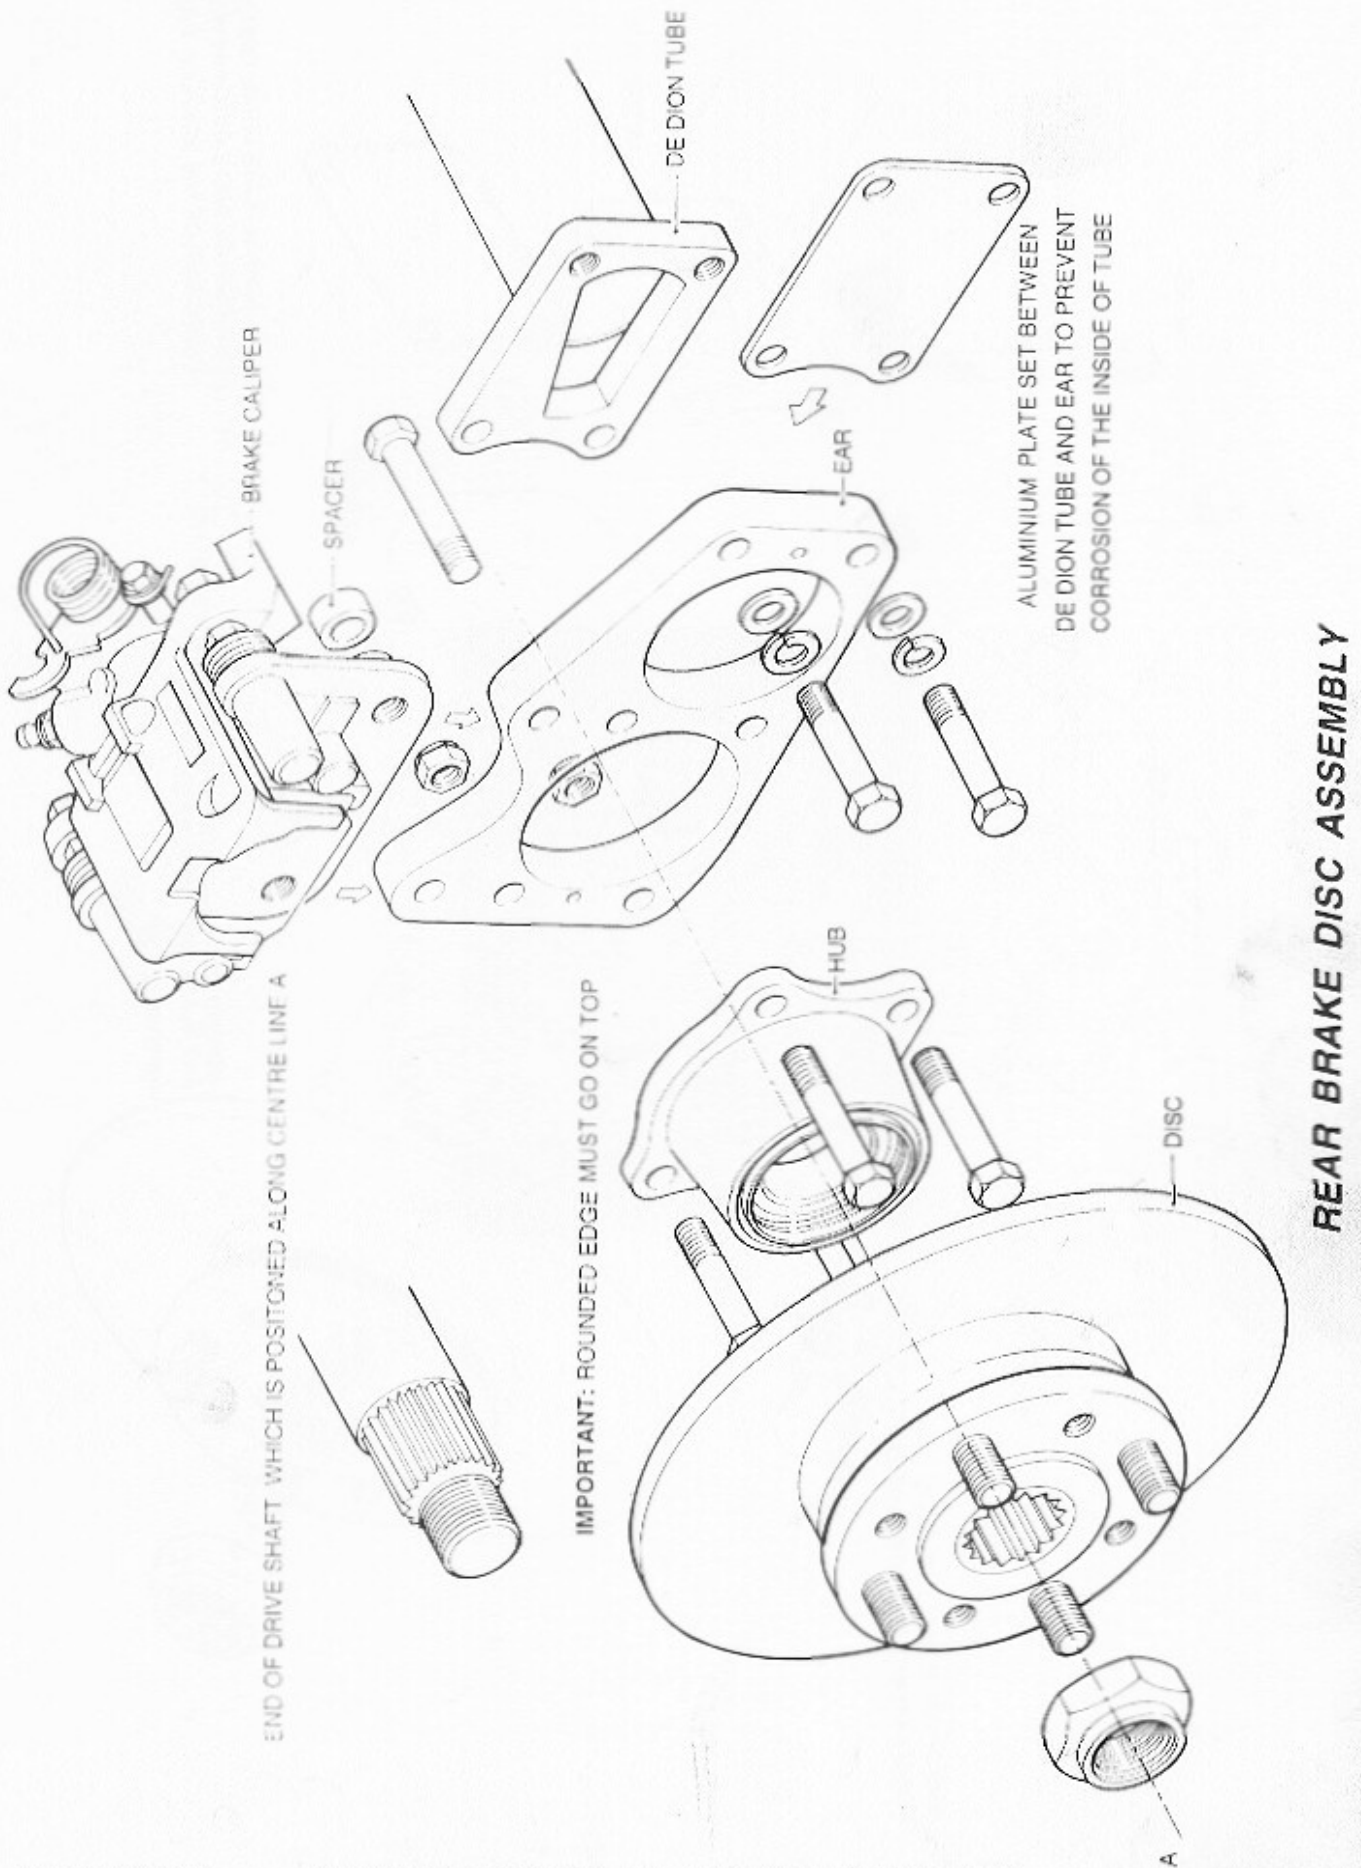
A Rear Hub and Brake Assembly (Standard Brakes)
